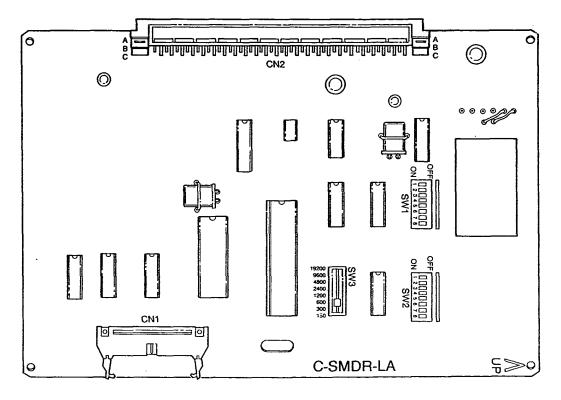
C-SMDR-LA PCB ASSEMBLY FOR UMT-32/64 INSTALLATION
